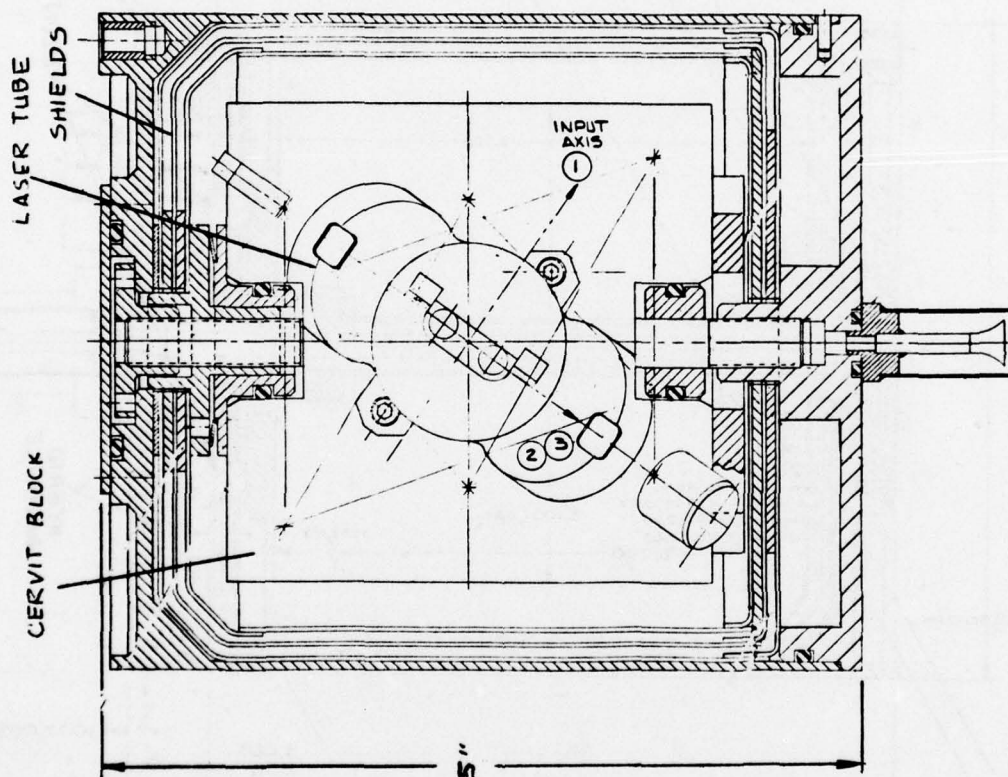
Cross-section of SLIC 7/2 Platform Showing Front View of Laser Tube
